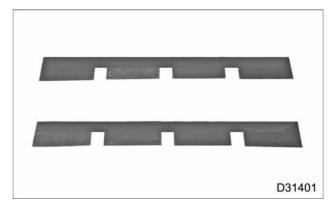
Magnetic Covers for Cylinder Head Intake Ports ZTSE4559
